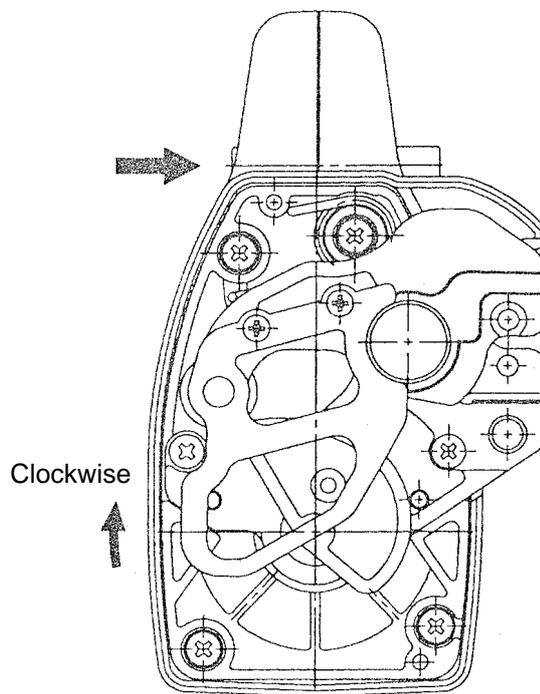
Rotating direction of the Cam Shaft [55] when the Pushing Button [3] is set to the  position
